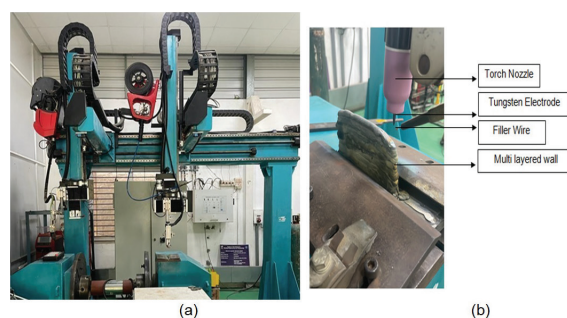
Images of a) GTAW welding machine setup with gantry, and b) WELDING TORCH nozzle and WAAM printed multi-layered wall
